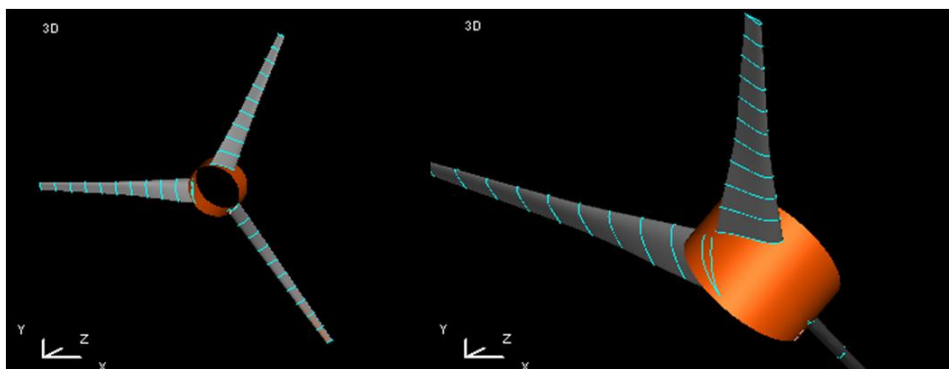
Geometry of 5 kW wind turbine rotor, AutoBlade™
